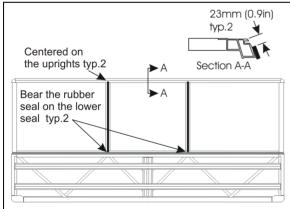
FACE FIXED WINDOWS - RUBBER SEAL INSTALLATION
